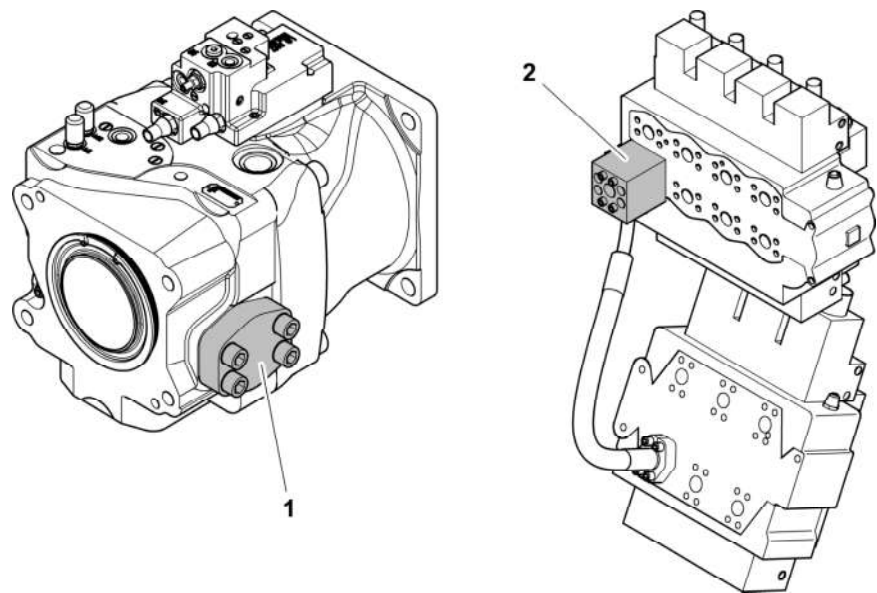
Sealing flange 1 and hydraulic block 2
